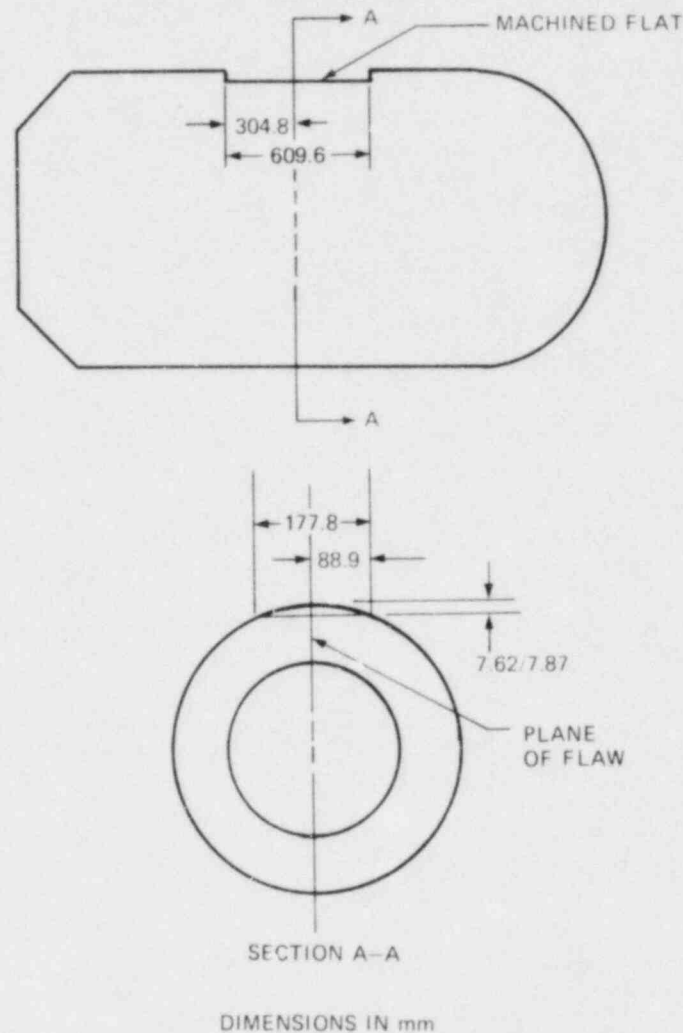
Dimensions of machined flat at flaw site in vessel V-8A.
